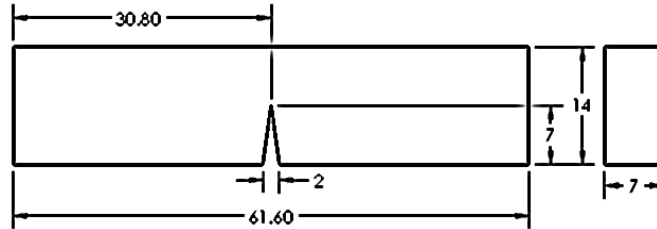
SENB specimen for fracture testing (all dimensions in mm).
